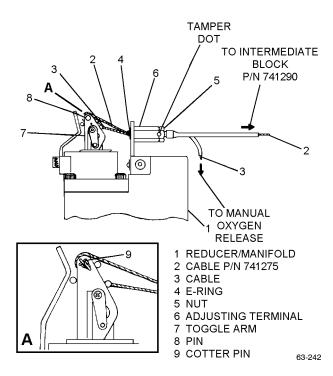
Reducer/Manifold Assembly P/N 741370 Cable Routing
